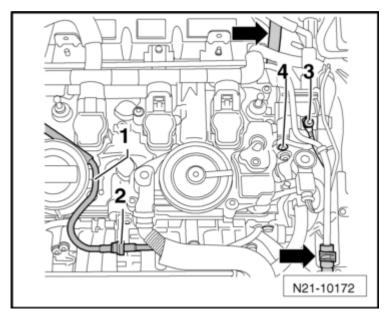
Identifying Vacuum Line -1-, Ground Wire -3- And Bolt -4-
